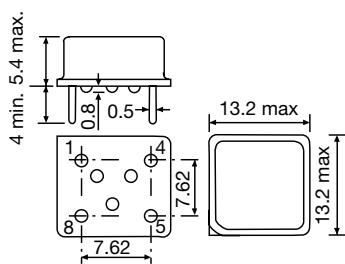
ECS-2100 Series – Side, Bottom and Top views
